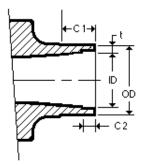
Opt-24 Butt Weld End Connection
